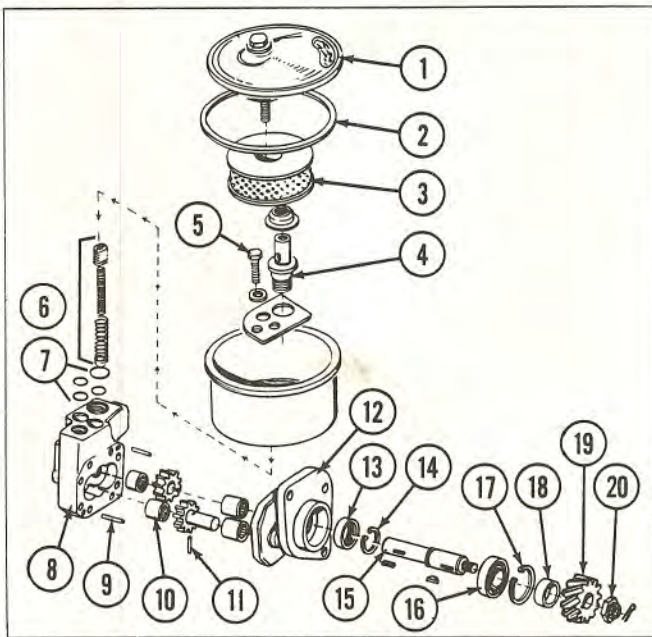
Barnes Power Steering Pump - Description and Sequence of Parts
